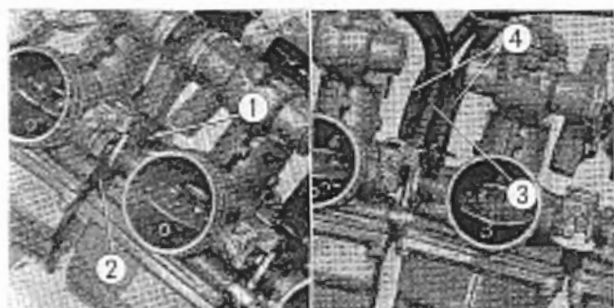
① Fuel tube (2.5×16) ③ Fuel tube
